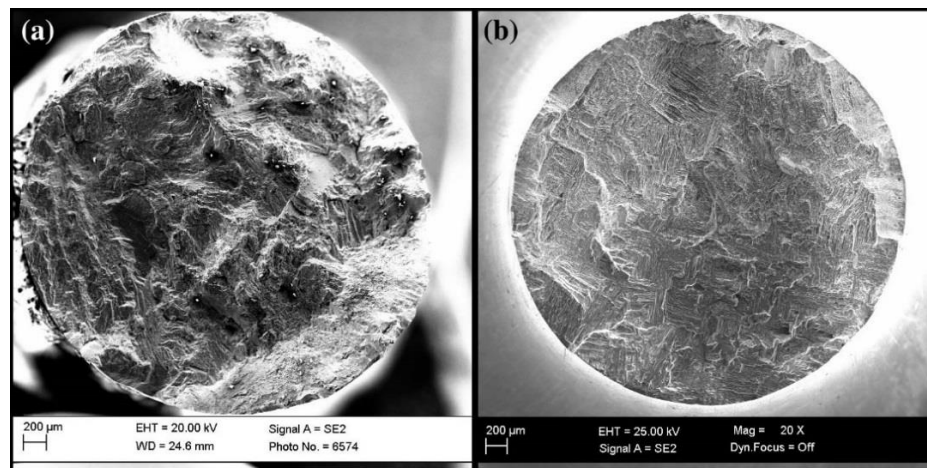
Representative fatigue fracture surfaces for (a) as-built LENS and (b) heat treated LENS Ti-6Al-4V.
